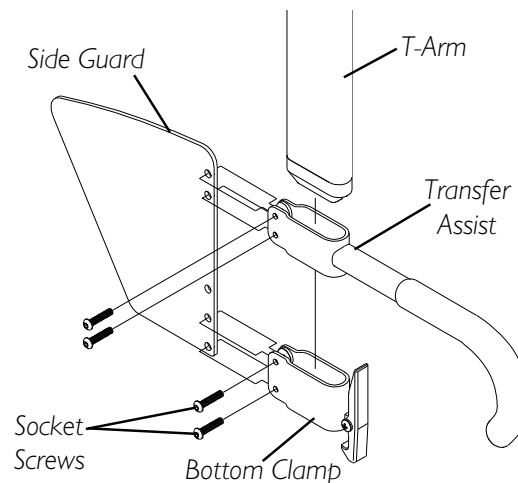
ADJUSTING T-ARM TRANSFER ASSISTS AND/OR SIDE GUARDS
